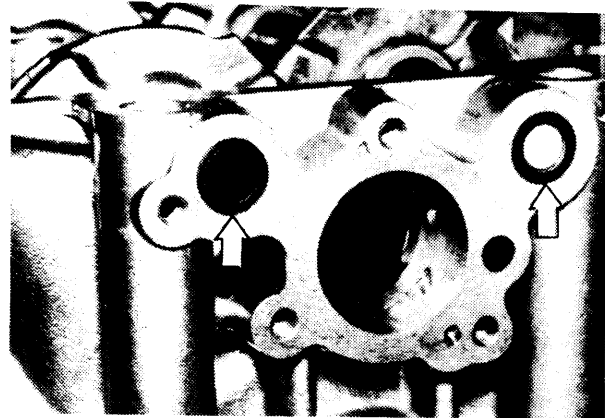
View Showing Rear Exhaust Rocker Shaft Plugs
